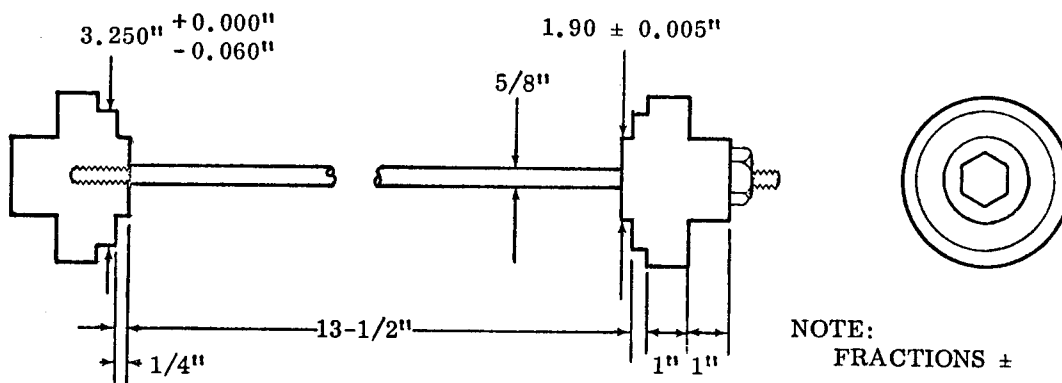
Tool Layout for Machining PBI-Carbon Composite Cylinders
